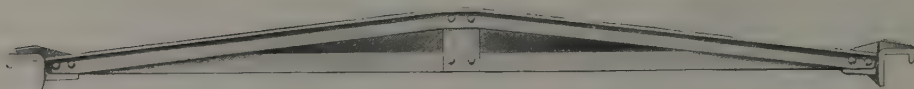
Western Steel Carline. Western Railway Equipment Company.
